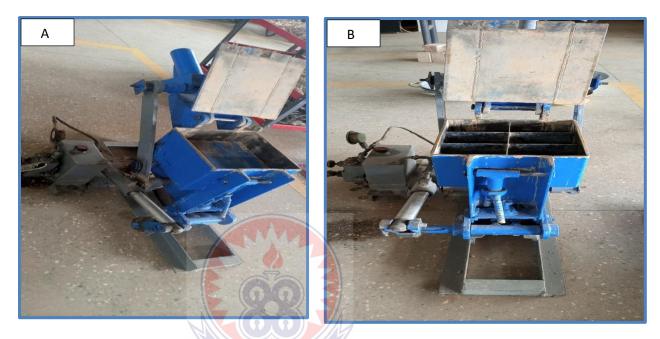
Hydraulic Compressed Block Moulding Machine.
